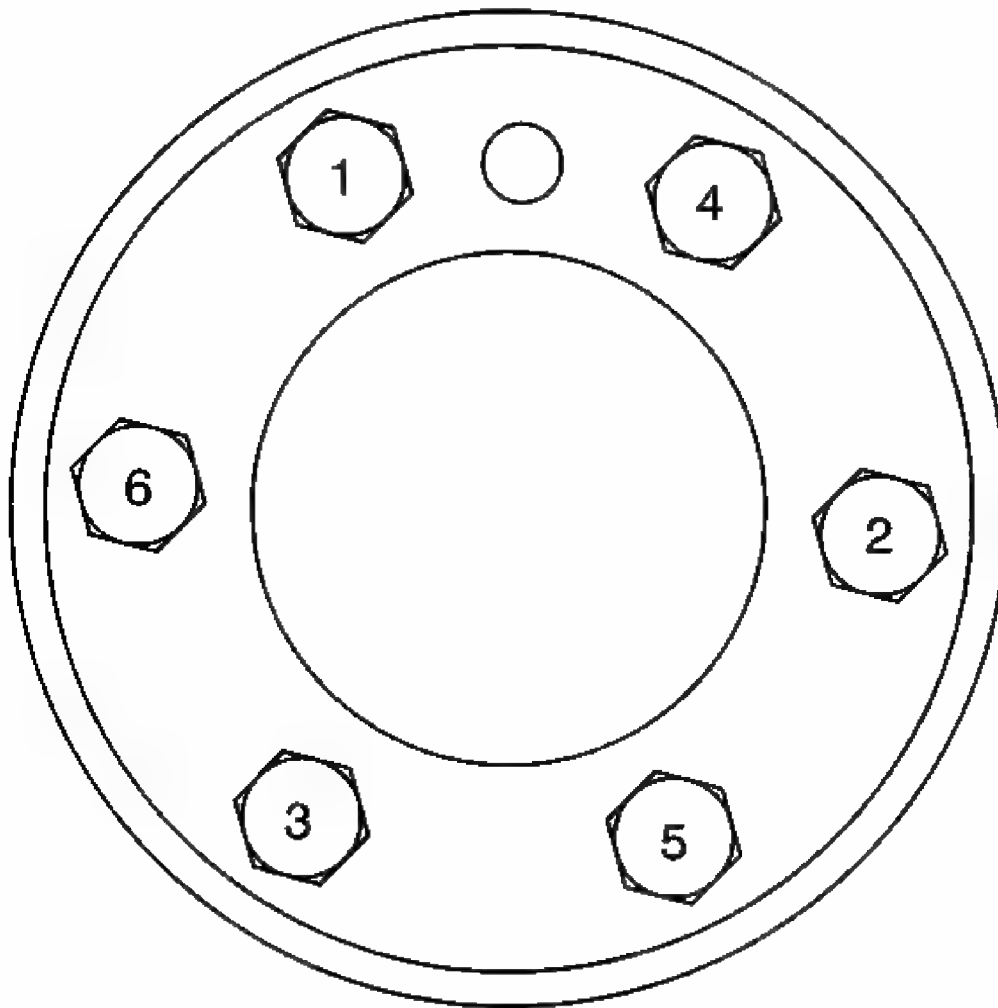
Identifying Flywheel Bolt Tightening Sequence
